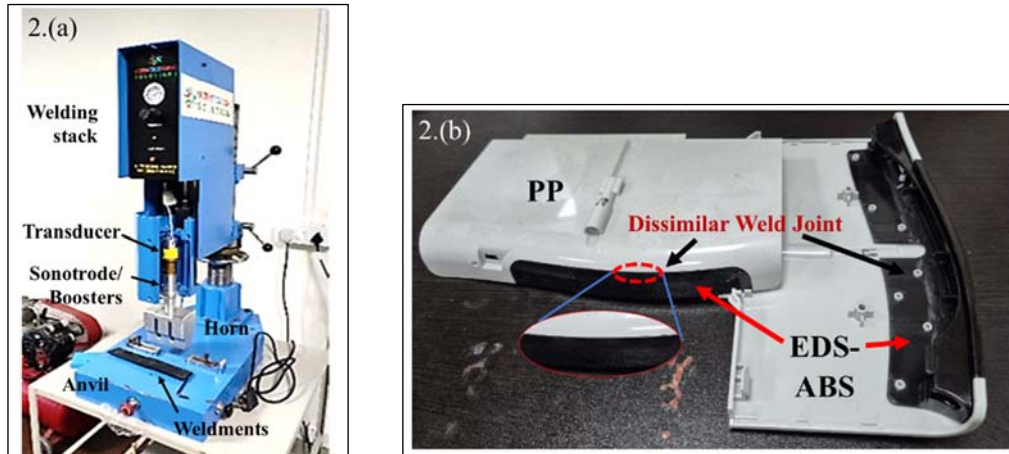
Equipment and materials: a) USW machine; b) the PP: EDS-ABS welded sample
